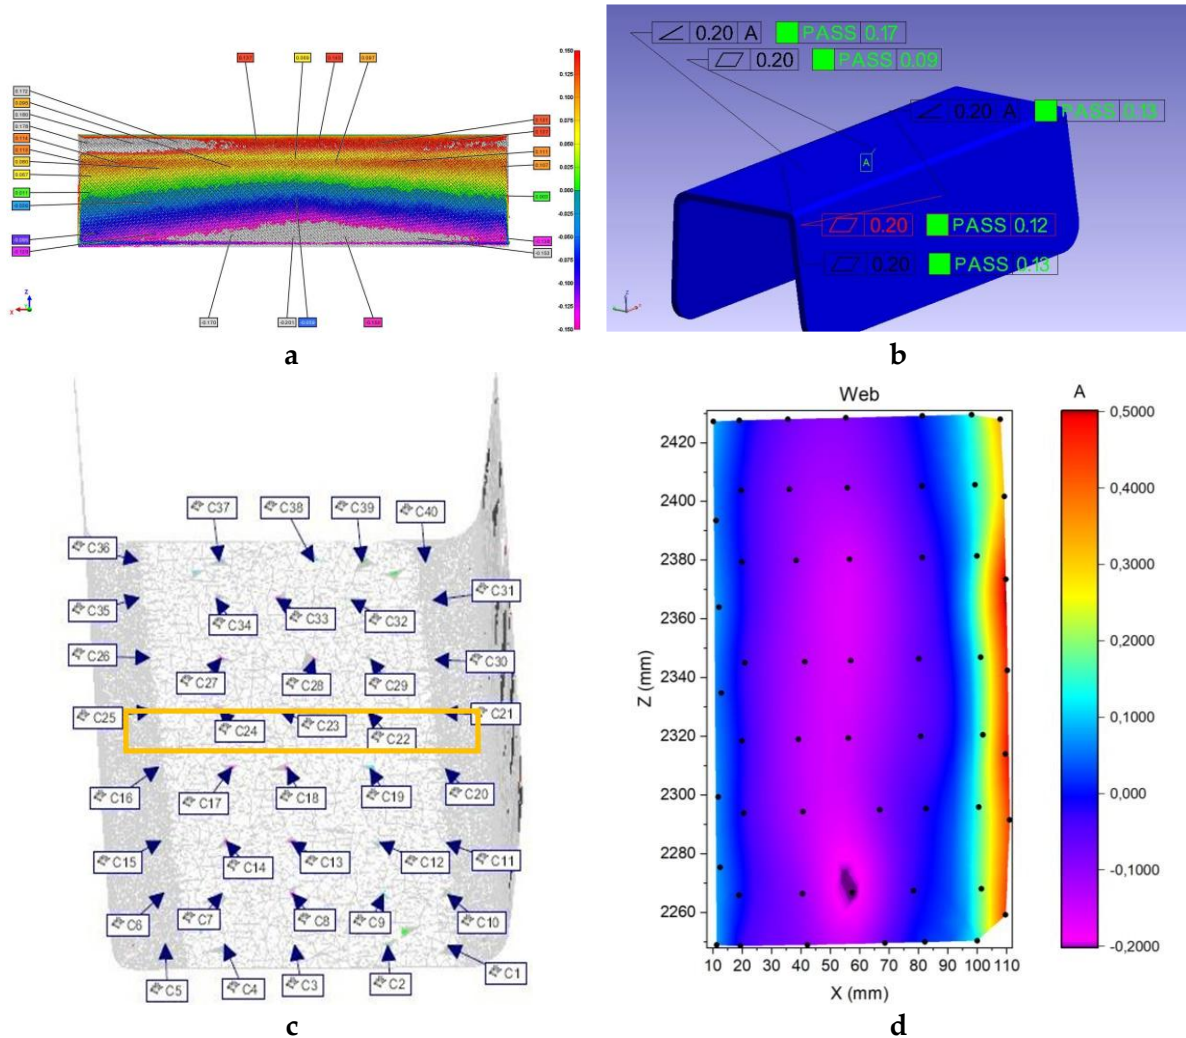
Measurements on molds and specimens: a) Geometric scanning of the mold with the PolyWorks optical system; b) Geometric scanning of the mold with the FARO Laser Tracker optical system; c) U-profile specimen measured with the CMM method – measurement points; d) Dimensional deviation map of the U-profile specimen.
